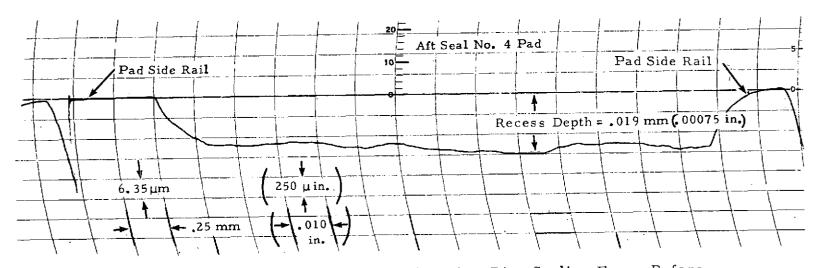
Trace of Forward and Aft Seal Carbon Ring Sealing Faces Before 500-Hour Endurance Test - Trace Taken Radially Across a Self-Acting Lift Pad.
